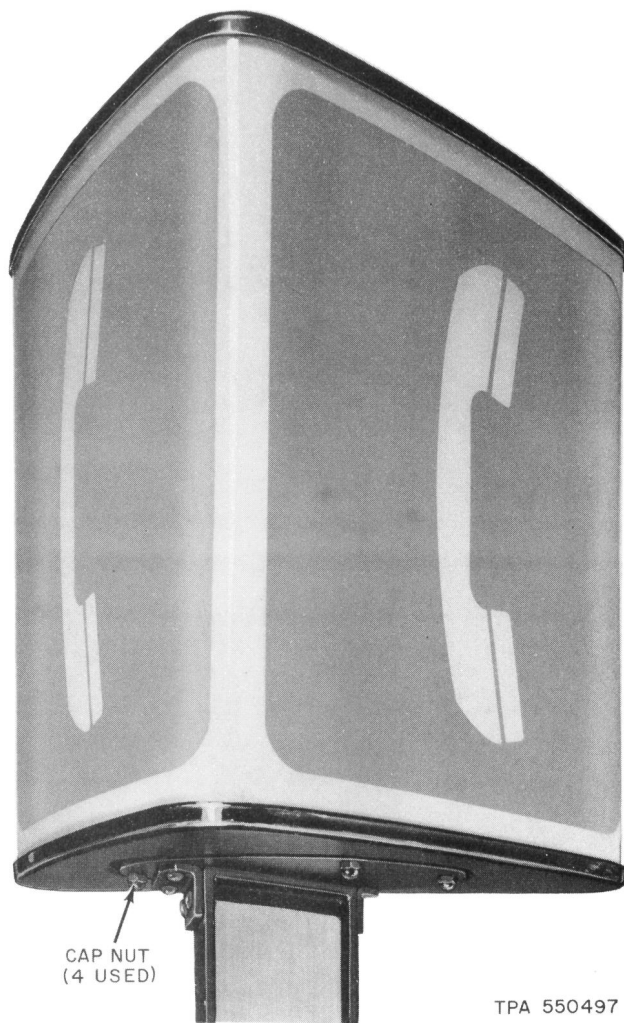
KS-20031, List 1 Sign Installed on KS-19426 Mounting Without Canopy
